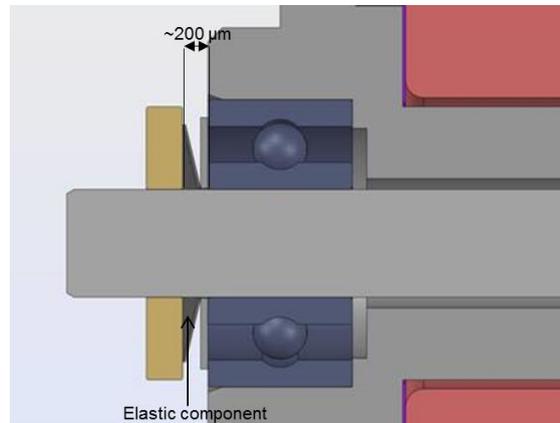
Illustration of the elastic component providing the ball bearing preload.
